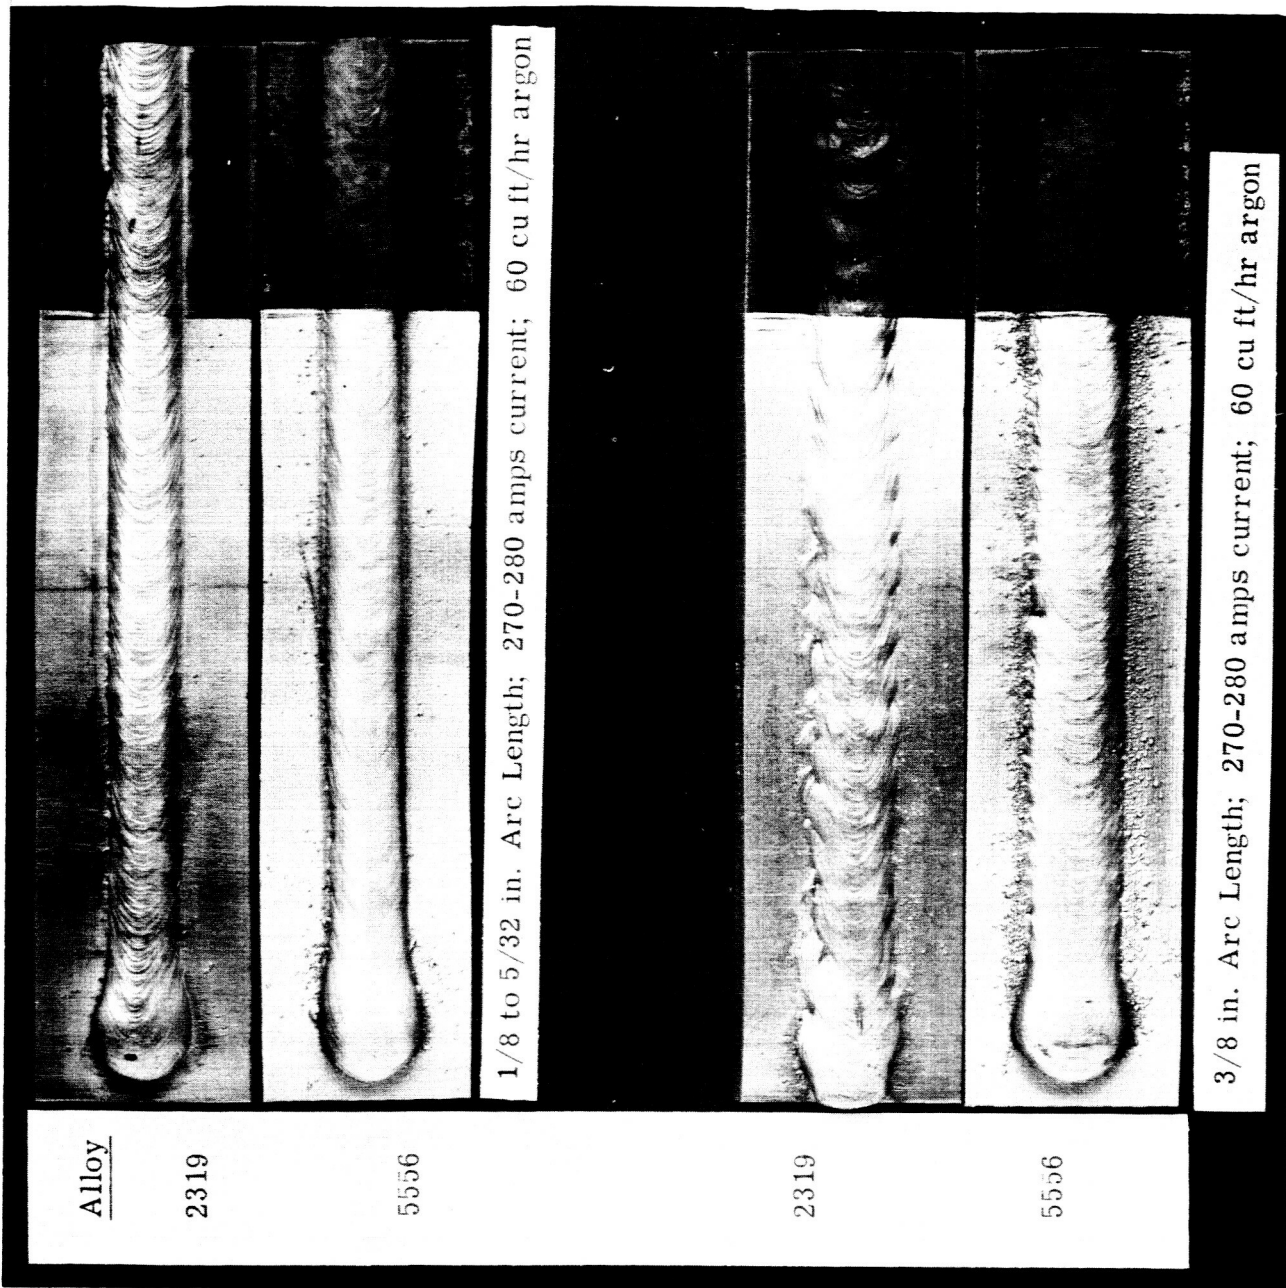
Photograph of weld beads deposited with 2319 and 5556 electrodes
